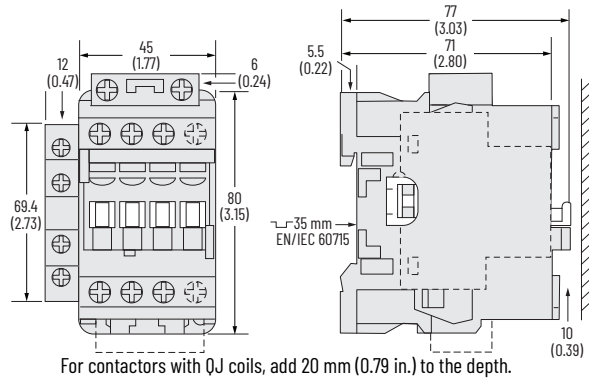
100-E09...100-E16 Contactors with Low-consumption Coils and Front-mounted Auxiliary Contact
